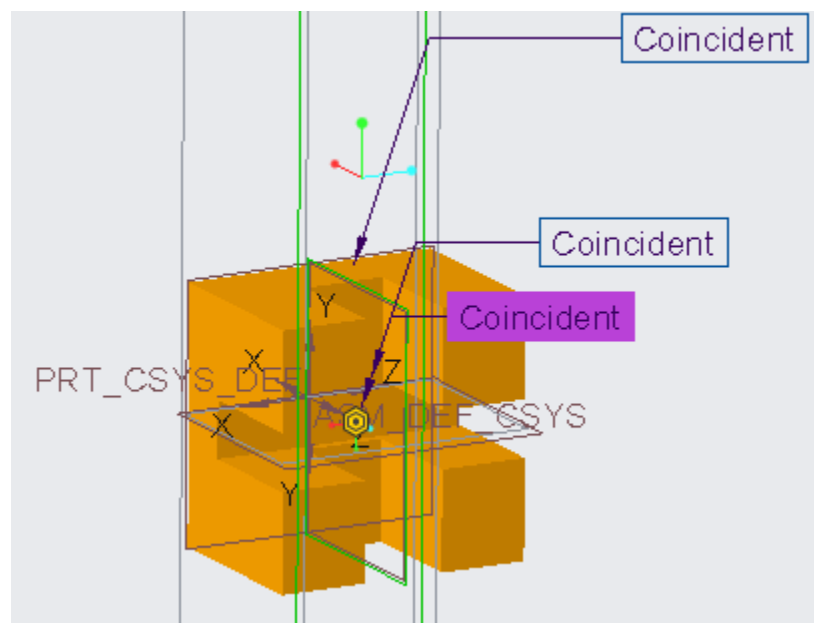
The figure above shows the alignment of the valve datum planes with each of the three assembly planes. Highlighted in green are the right plane of the valve and the front plane of the assembly.
